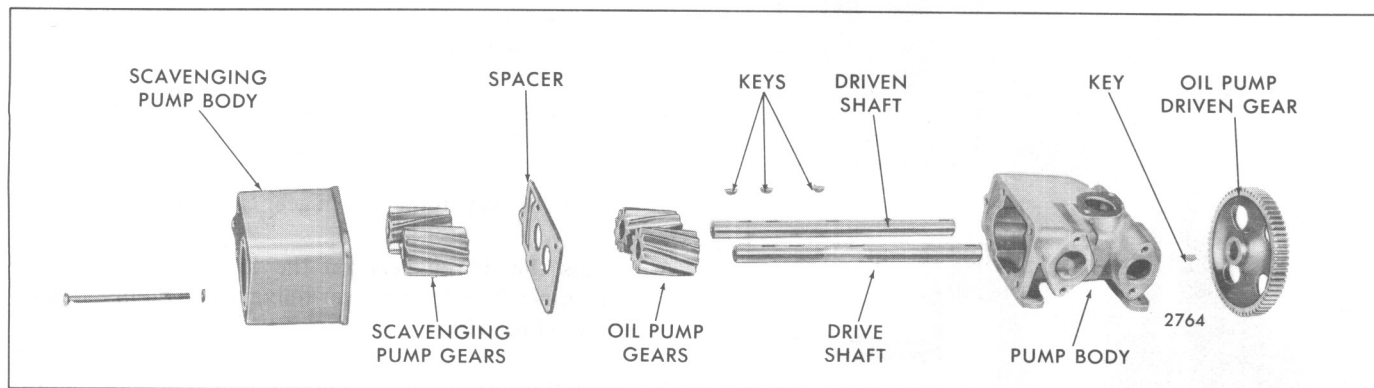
Lubricating Oil Pump Details and Relative Location of Parts (12V-92 and 16V-92 Engines)
